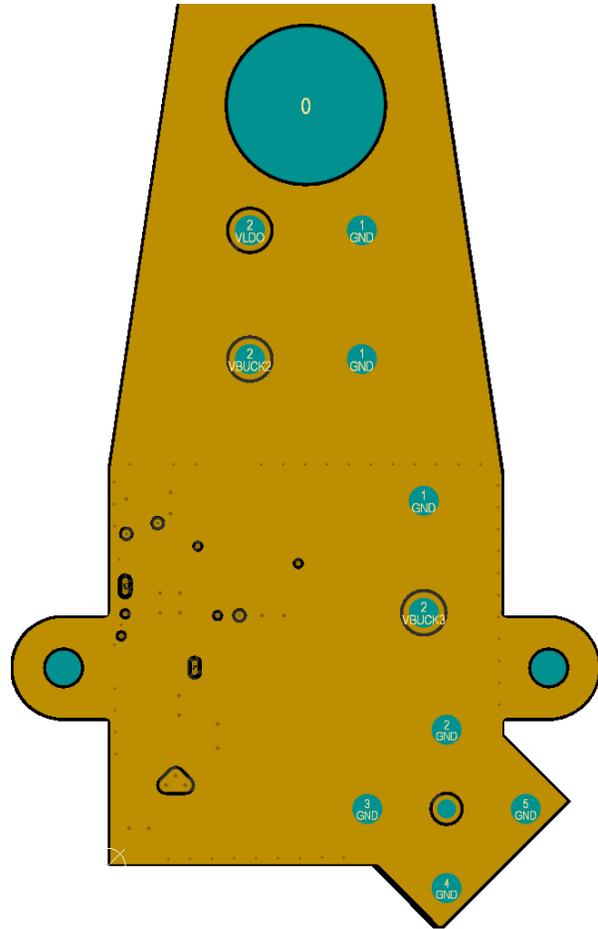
Printed Circuit Board Layer 2 (Ground Plane)
